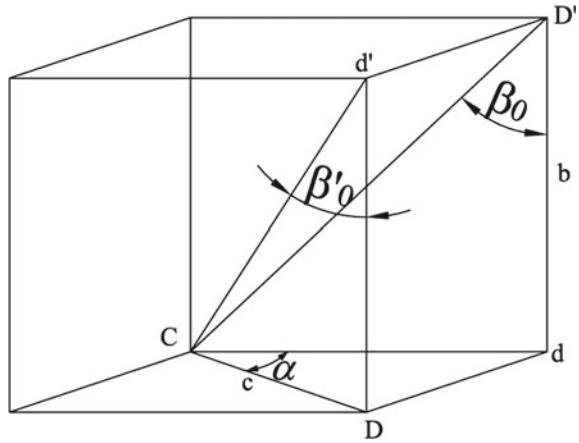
Location of wire on top of the workpiece surface in 3D spaces [11]
